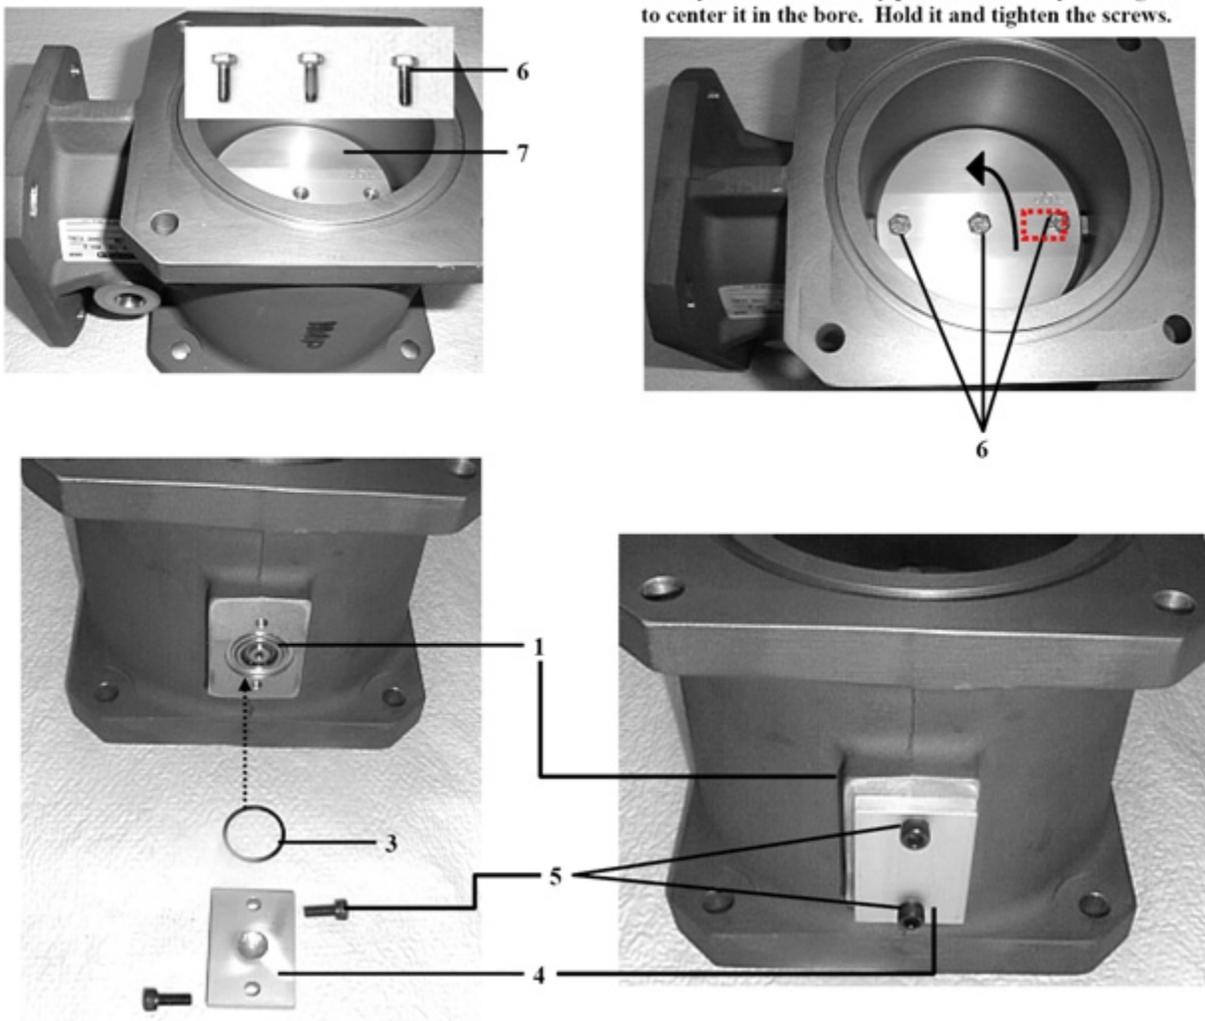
Secure the Butterfly Plate and Install the End Cap
